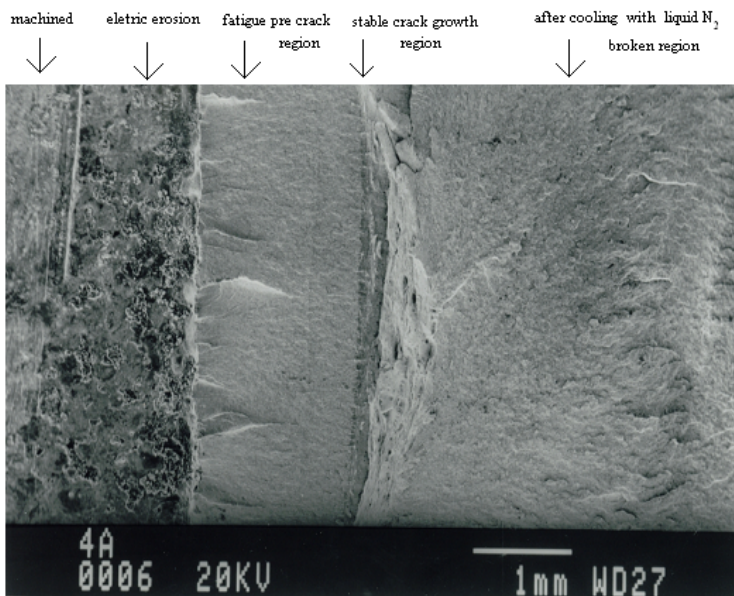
Fractography of fracture surface of CTOD_m specimens, all regions. Sample 4A.
